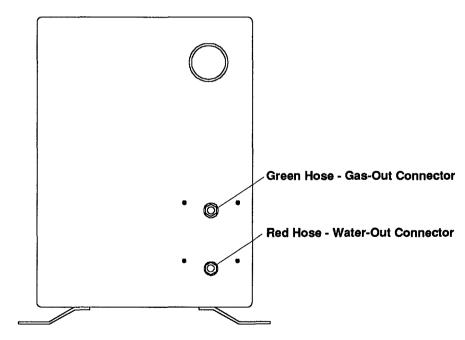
2 HF Console (Slave shown) - Torch Connections
